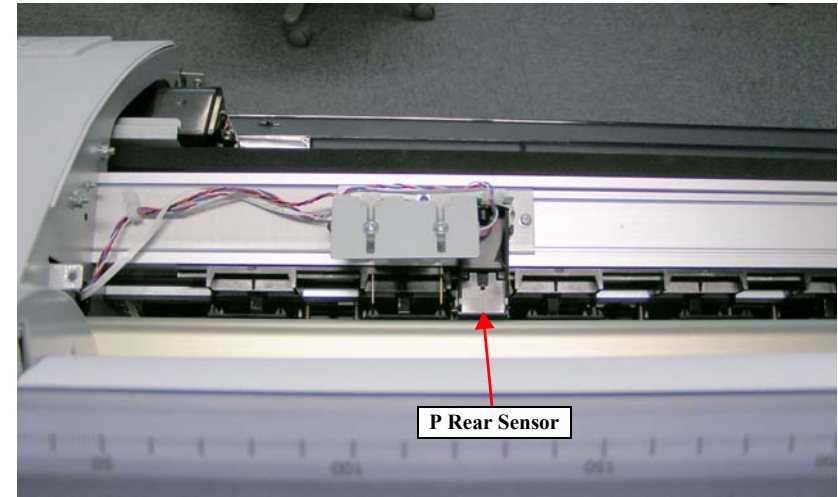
Paper Feed Assembly (P Rear Sensor)
